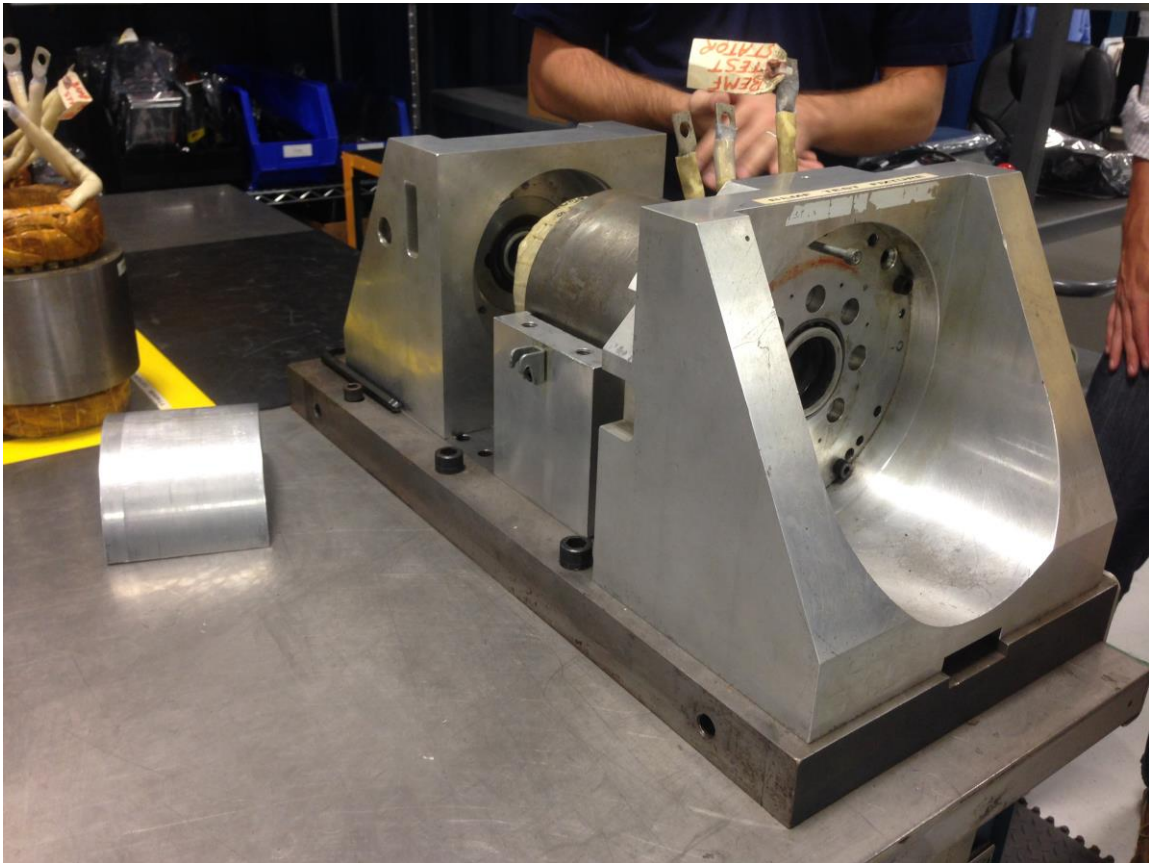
Previously designed Back EMF Test Fixture for smaller compressor model
